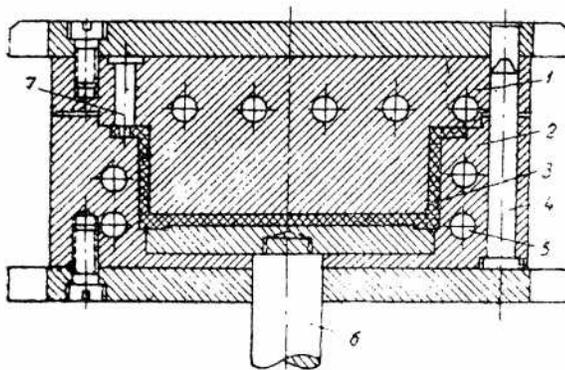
Single-core mold with individual heating system: 1 - punch; 2 - matrix; 3 - common; 4 - guides; 5 - heating elements; 6 - lifter; 7 - finger forming a hole
